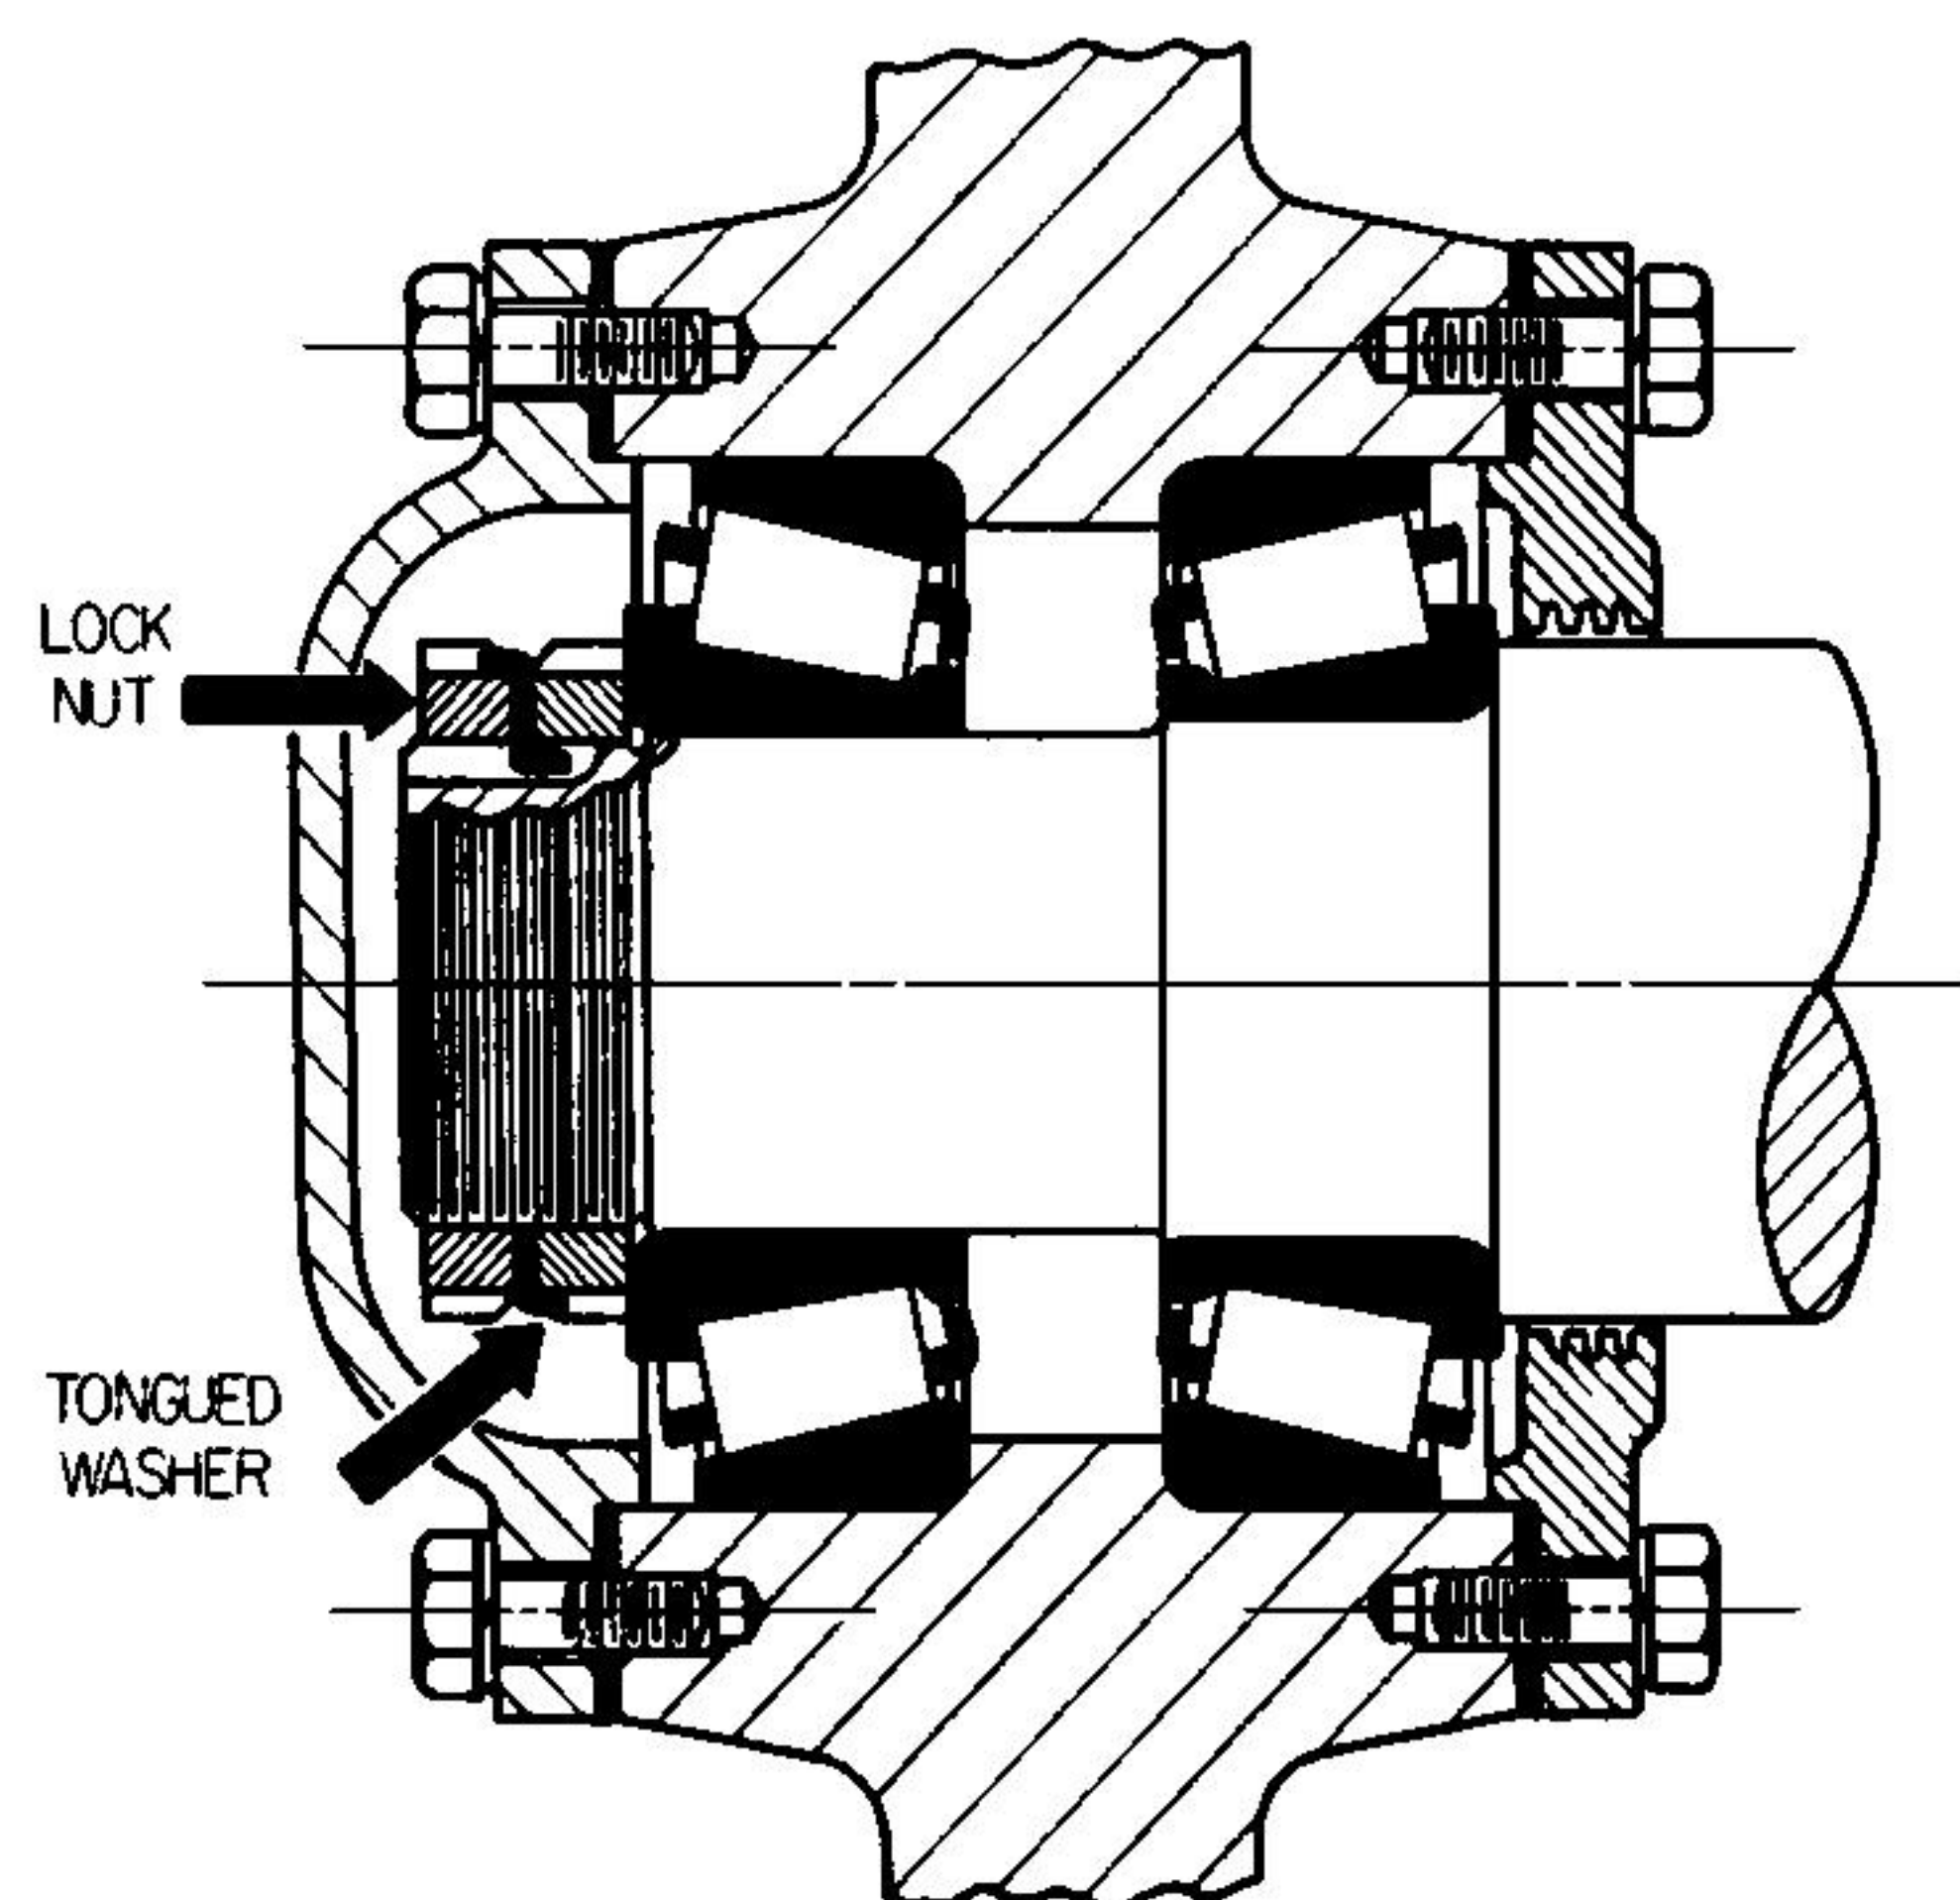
Double-nut and lock-washer adjusting device.
